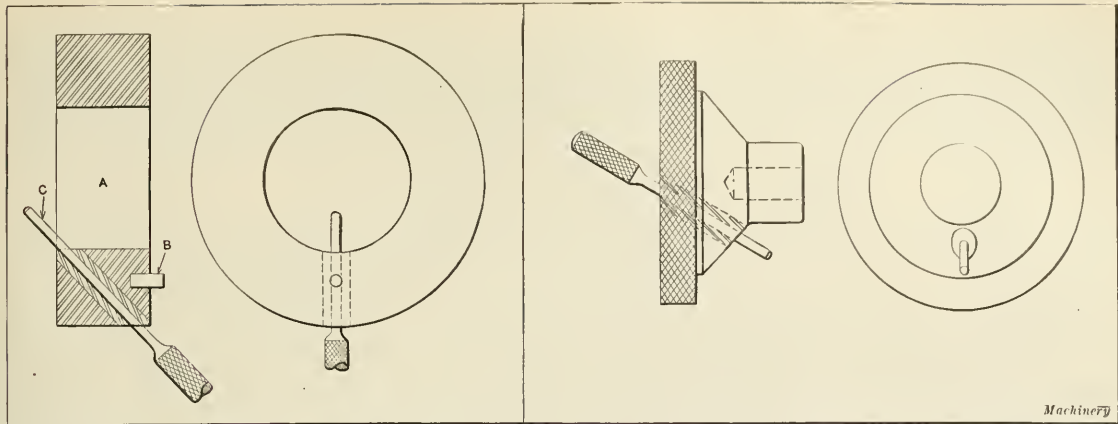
Gage for locating Angular Hole drilled in Stem of Fuse Body
